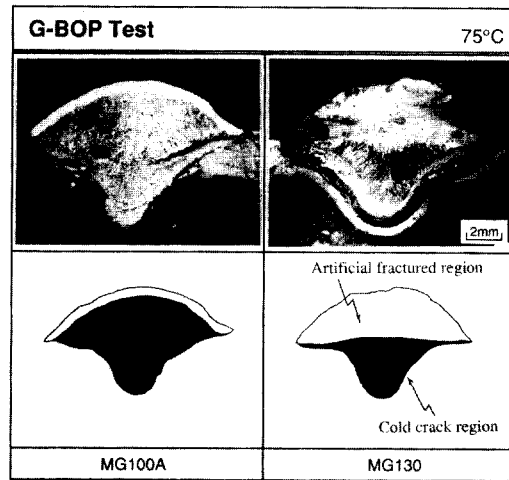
Fractured surface of weld metals after G-BOP test with 75°C preheating
